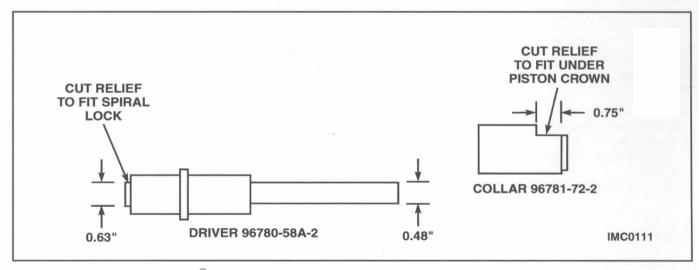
Modification to JIMS® piston lock ring tools 96780-58A-2 and 96781-72-2
